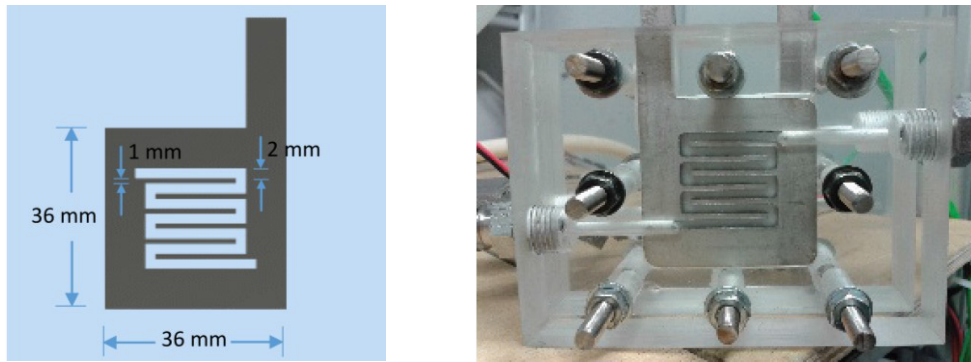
a) Current collector draw; b) Fuel cell assembly
